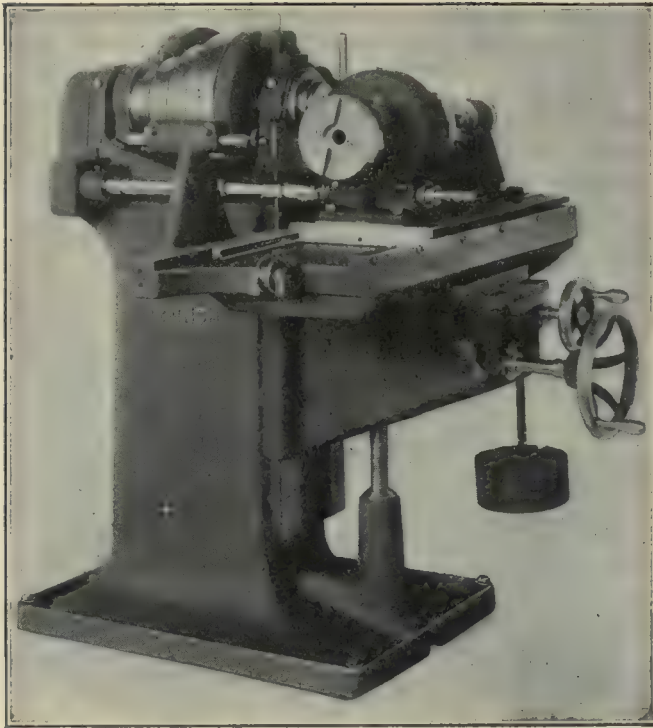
GARVIN CAM MILLING MACHINE SET UP FOR CYLINDRICAL CAMS
